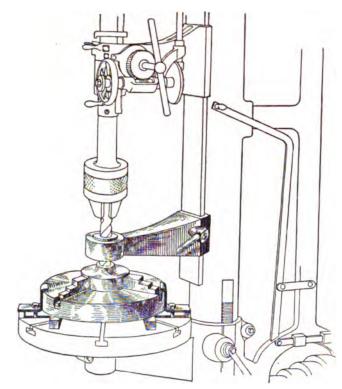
AN ADJUSTABLE UNIVERSAL CENTERING JIG
